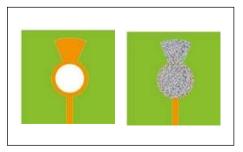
Layout area for additional solder paste volume: layout/after printing
